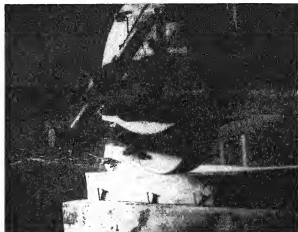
Swing frame grinder working on grey iron with extractor head fitted and operating.
